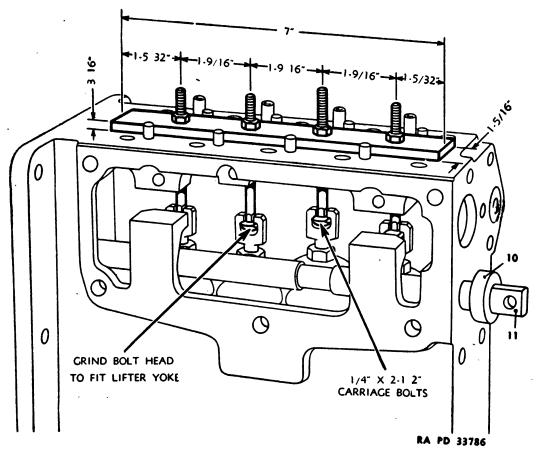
Plate construction for the removal of fuel injection pump lifter springs.
